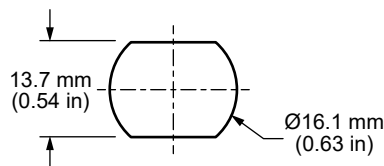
ANT-8/9-SPNF1 Mounting Hole Dimensions
